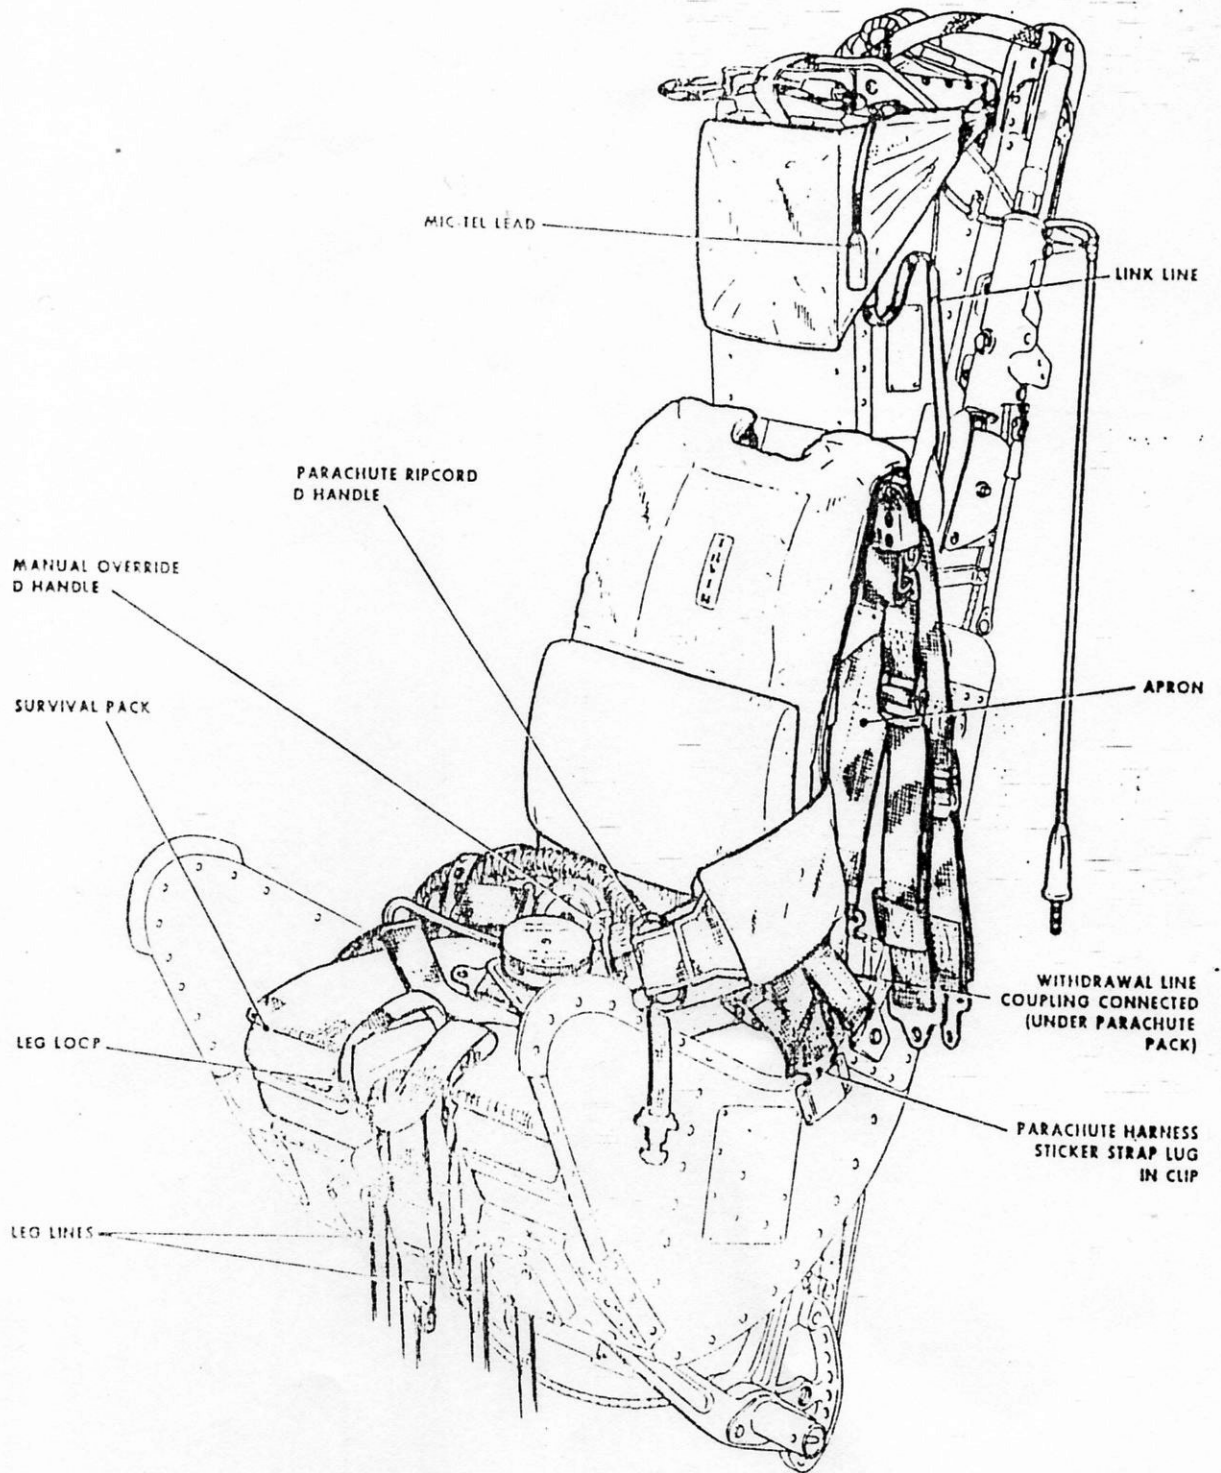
The seat equipped, Mk 18 parachute assembly (port)
